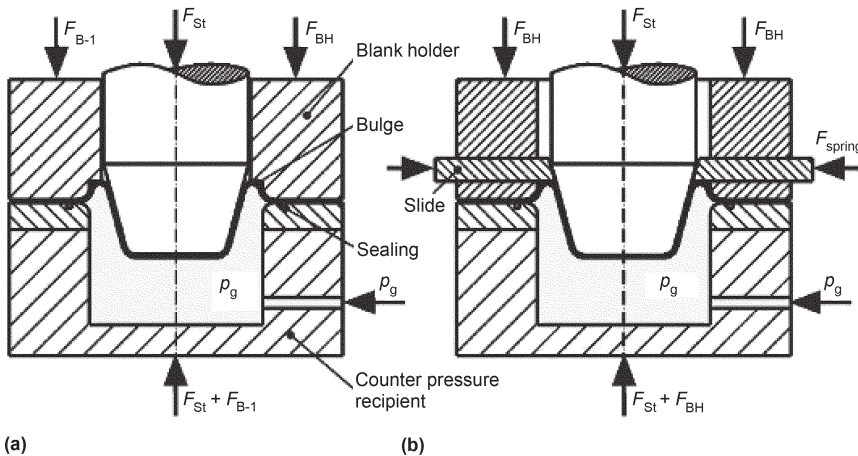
Bulge height control techniques. (a) Using a modified blank holder. (b) Using a mechanical sliding mechanism. Source: Ref 8.17
